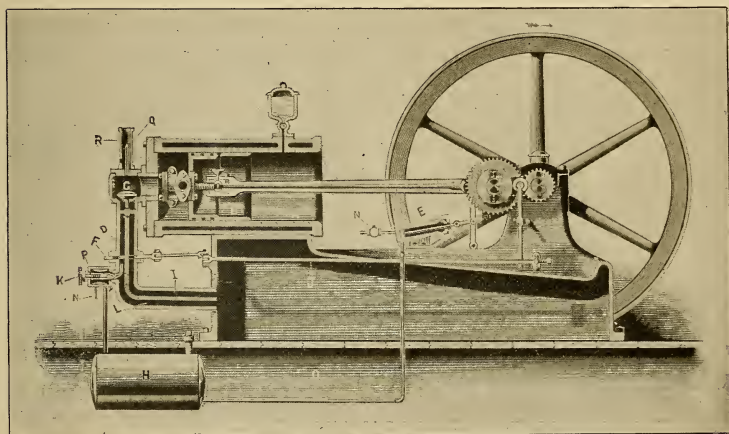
SECTIONAL ELEVATION OF THE CALDWELL-CHARTER GAS ENGINE.
